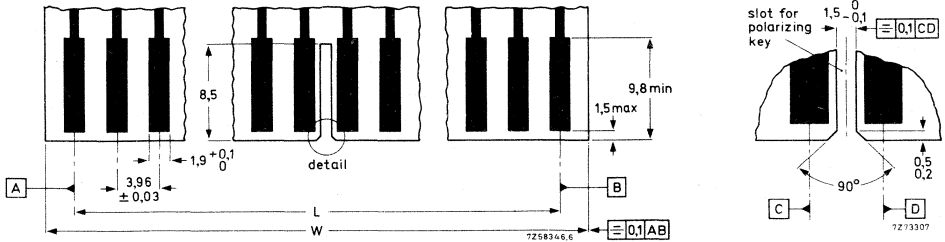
Recommended dimensions of the printed-wiring board; see Table 4 for dimensions L and W.
